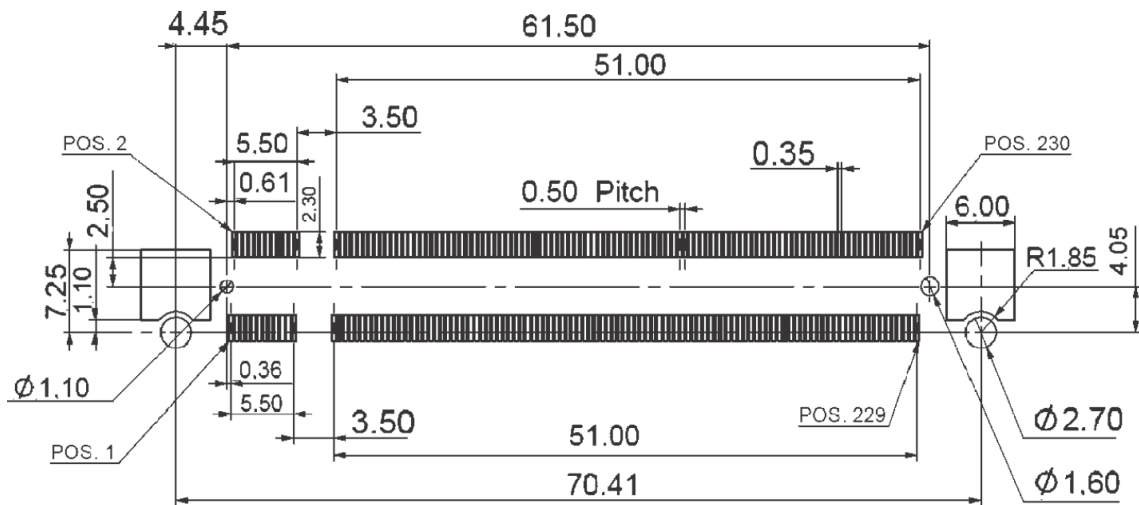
Carrier Board PCB Footprint for Yamaichi MXM Connector
